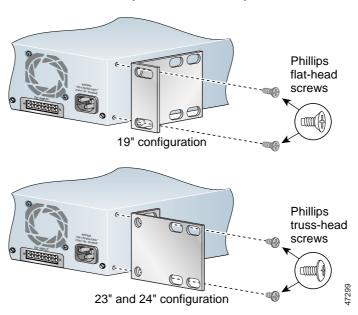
Attaching Brackets on Catalyst 2912MF XL and 2924M XL Modular Switches (Rear-Panel Forward)
